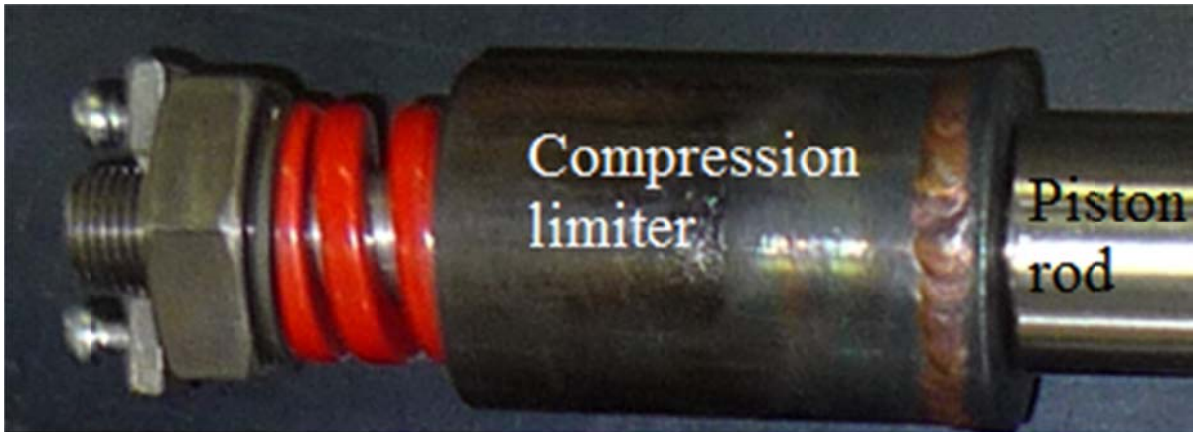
AWL moving welding head coupling system (spring and compression limiter)
